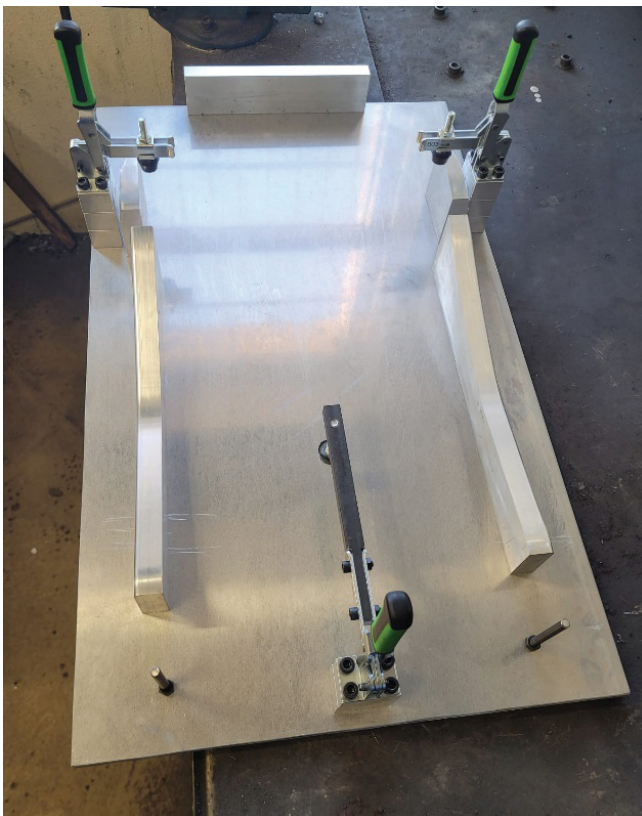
General view of the stabilizing fixture for the seat back cover post-injection molding (source: own work)
